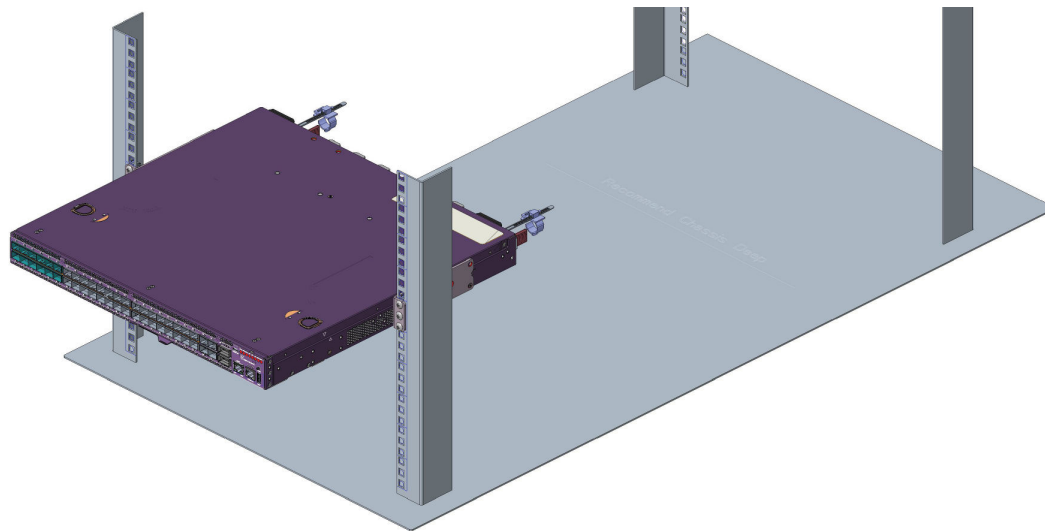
Mid-Mount: Attaching the Mounting Brackets
